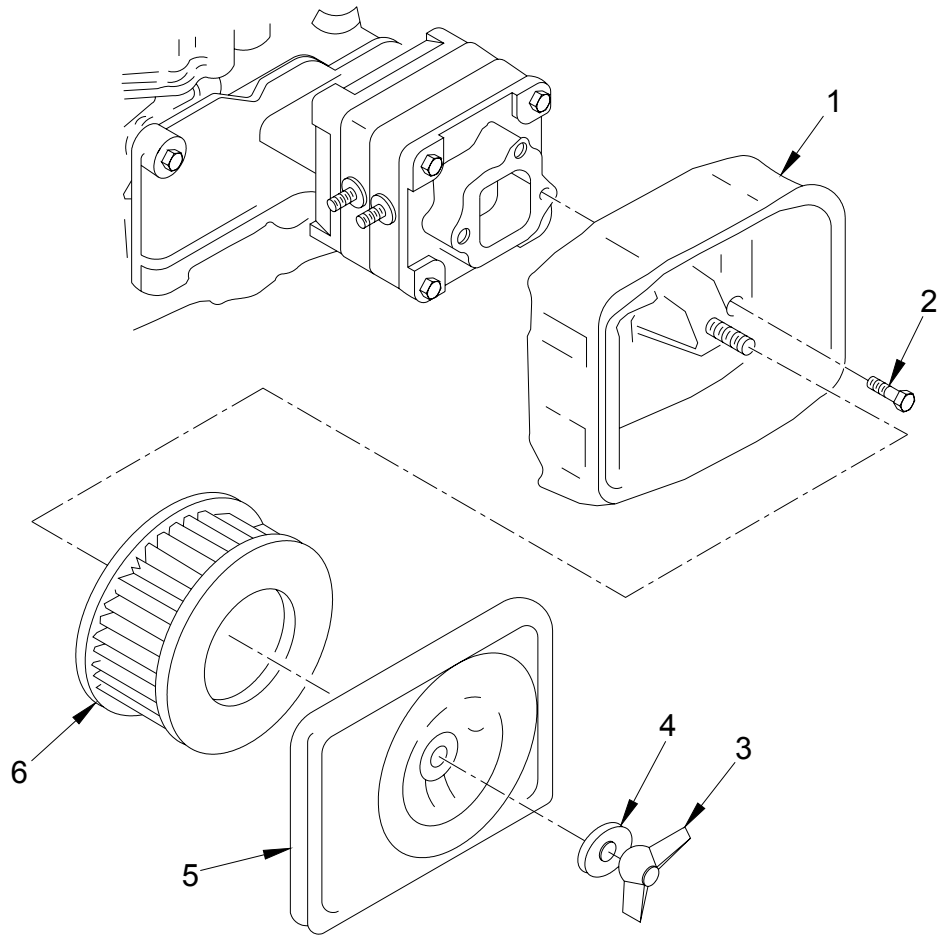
FUEL SYSTEM ASSEMBLY/AIR CLEANER ASSEMBLY
